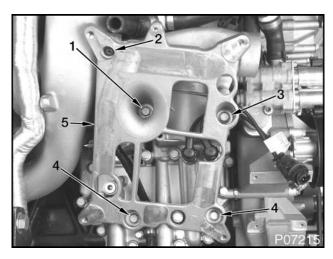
Low Pressure Charge Air Cooler (LPCAC) bracket
